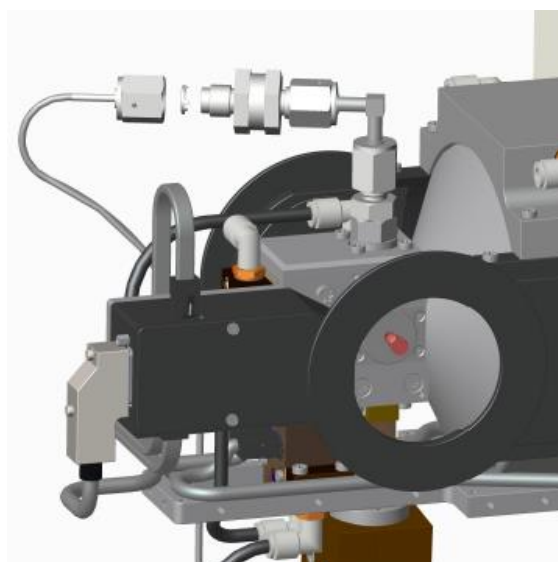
Connect the port on the high-pressure tubing to the nozzle assembly using an unplated stainless steel VCR gasket. Pay careful attention to the assembly instructions in the text above.
